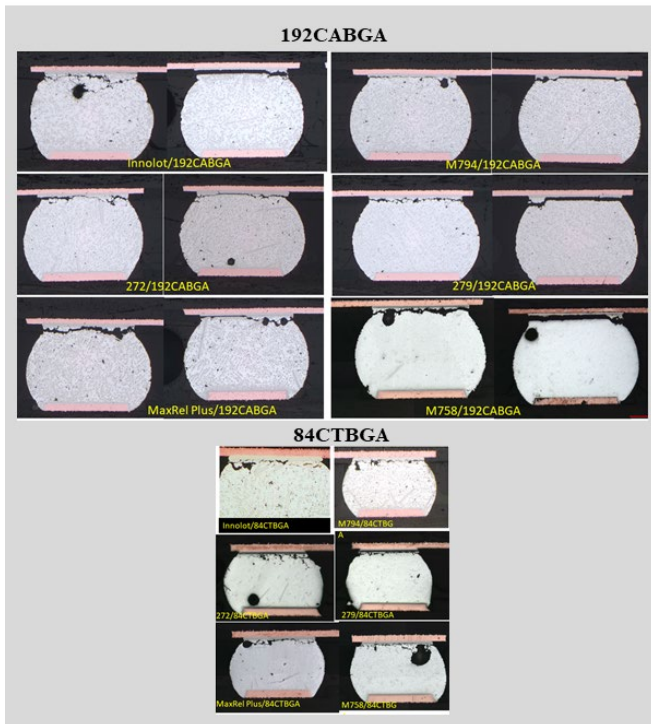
Optical photomicrographs showing examples of thermal fatigue damage and interfacial fracturing in the solder joints of the 192CABGA for all the high-performance solder alloys (upper), and solder fatigue damage only in the solder joints of the 84CTBGA for all high-performance alloys. SAC305 exhibits only fatigue damage with both components. The thermal cycling test profile was -55/125 °C (TC4).
